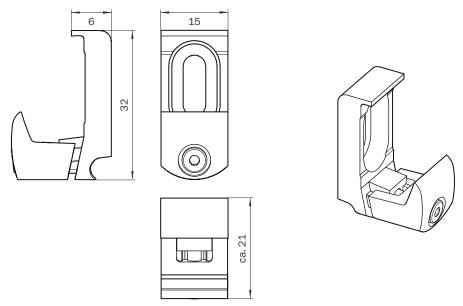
Dimensional drawing of C-Fix bracket (mm), part number 2045843 (kit)
